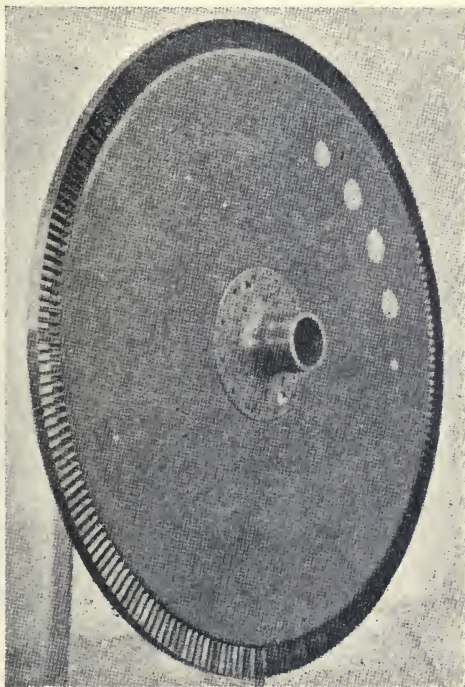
SINGLE WHEEL, RATEAU STEAM TURBINE.
